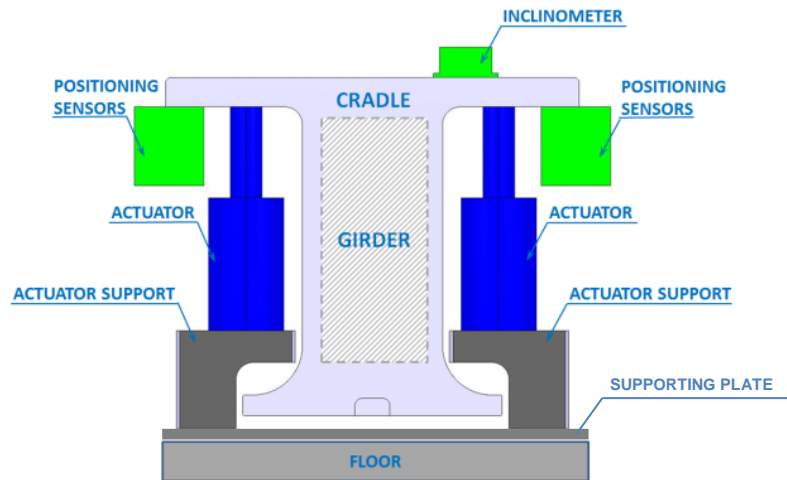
Schematic view of the cradle with actuators and sensors assembled [13]
